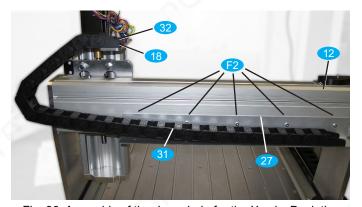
Assembly of the drag chain for the X axis. Deviating from the standard construction, the motor plate 18 with the drag chain support is installed on the inside to save width.
